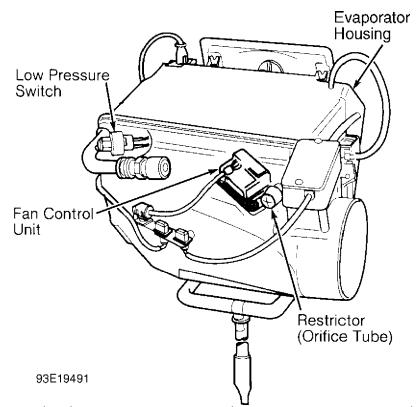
Identifying Fan Control Unit & Low Pressure Switch Courtesy of Audi of America, Inc.
